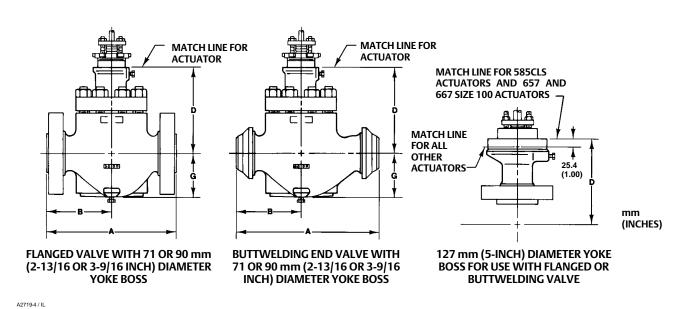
NPS 1-1/2 x 1 through 6 Globe Valve Dimensions with Standard Bonnet (also see tables 22, 23, and 24)
